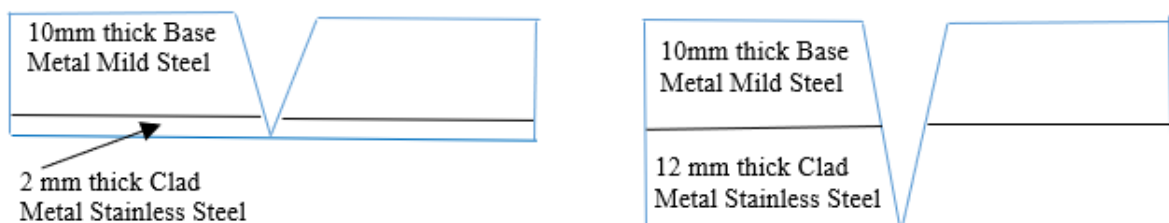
A schematic diagram of a weld set up for (a) mild steel (10 mm) and 2 mm stainless steel
